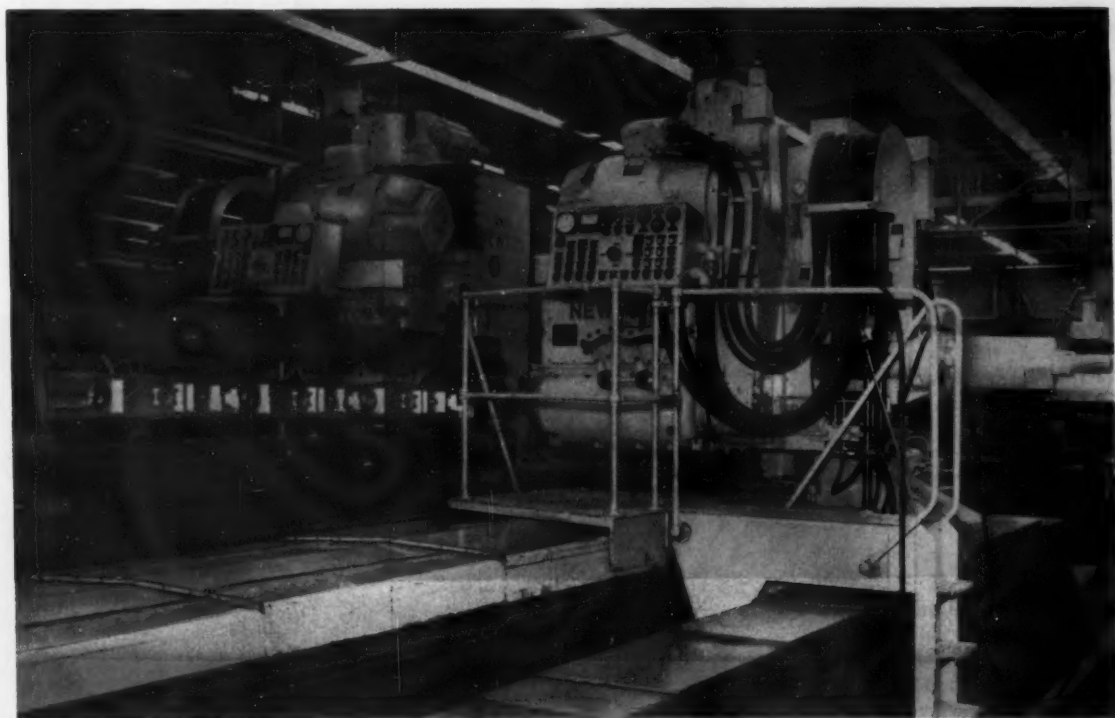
Another view of the double-headed, tape-controlled milling machine which particularly illustrates the right-hand milling head.
